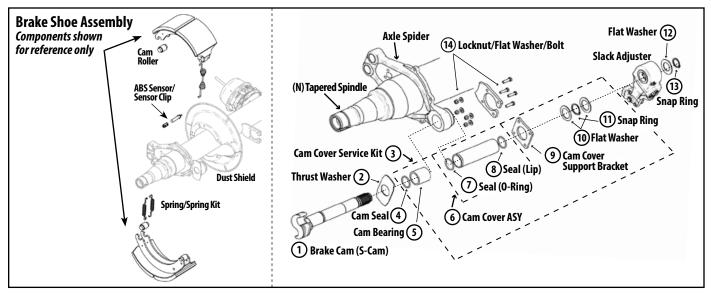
165xxxx Service Parts – Drum Brake Bent-Tube Axle - (N) Tapered Spindle; Short Cam with Cam Cover
